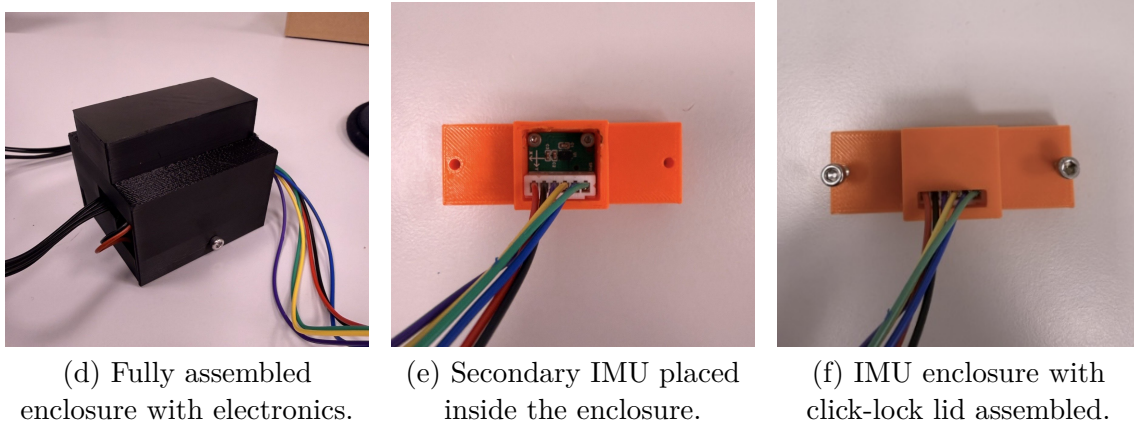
Integration and assembly of the secondary IMU and enclosure components.
